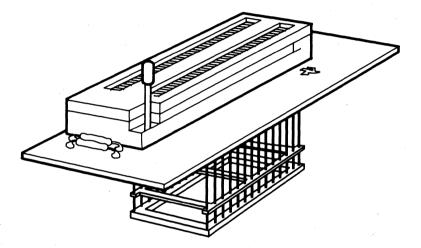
EPROM ADAPTOR SOCKET (40-pin to 28-pin DIP Conversion)
